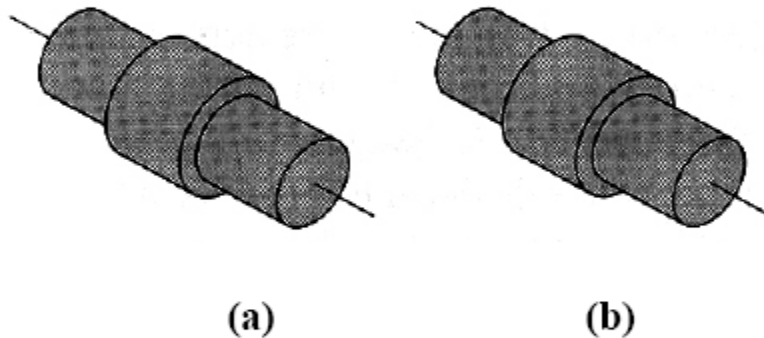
Two parts of identical shape and size but different manufacturing requirements: (a) 1,000,000 pc/yr, tolerance = ± 0.010 in, material = 1015 CR steel, nickel plate; and (b) 100 pc/yr, tolerance = ± 0.001 in, material = 18-8 stainless steel.
